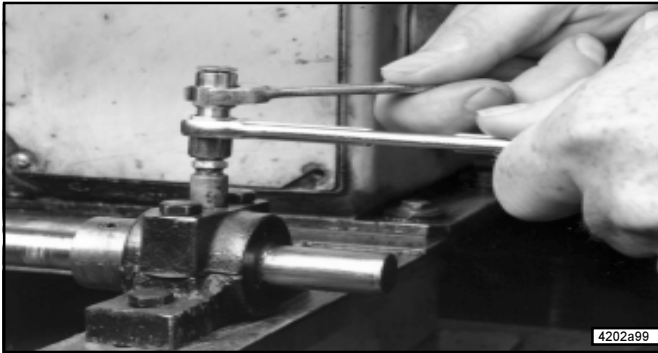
Screwing Quicklinc fitting into the Zerk-Lock body
